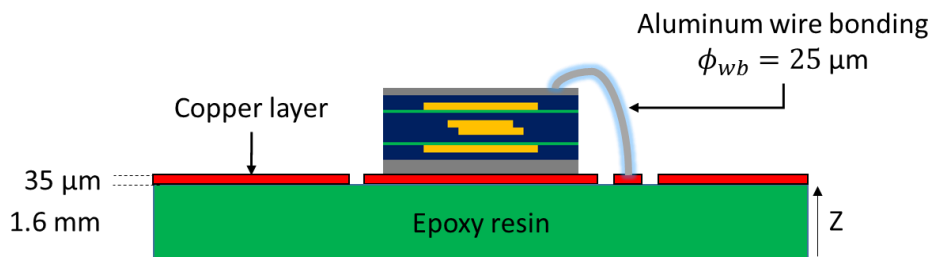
Schematic of the wire bonding between M3EM and the PCB.
